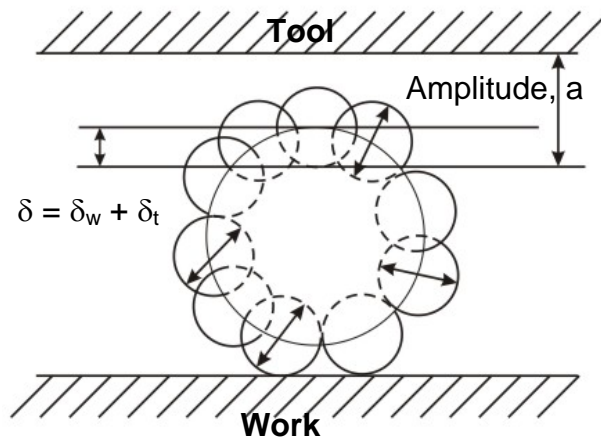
Interaction between grit and workpiece and tool to depict the workpiece and tool deformations
